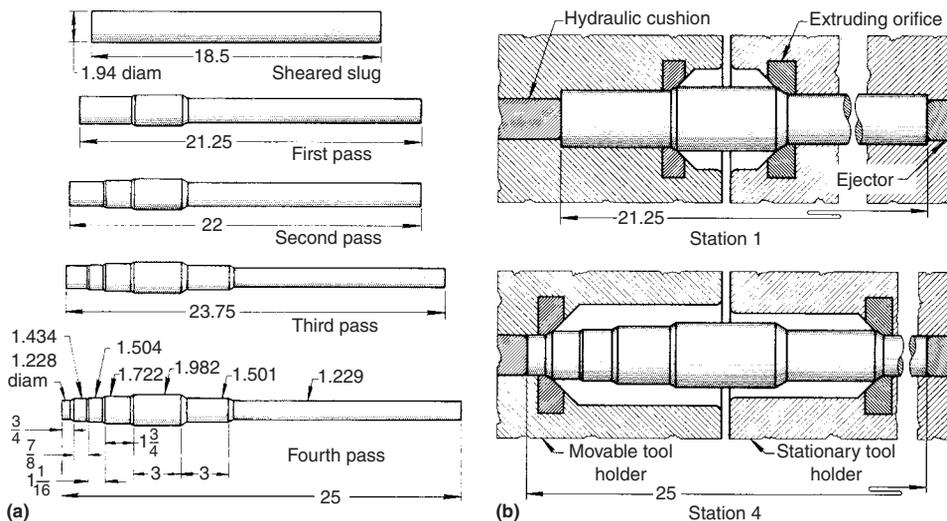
4028 steel transmission shaft produced by four-pass forward extrusion in a four-station open die. (a) Shapes produced in extrusion. (b) Two of the die stations. Dimensions given in inches
